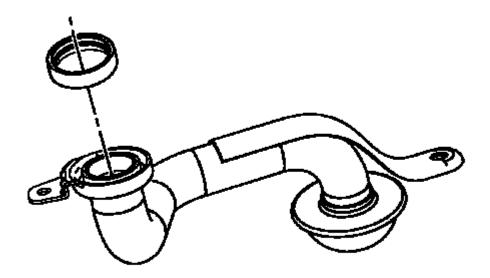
Locating Oil Suction Tube Seal Courtesy of GENERAL MOTORS COMPANY
